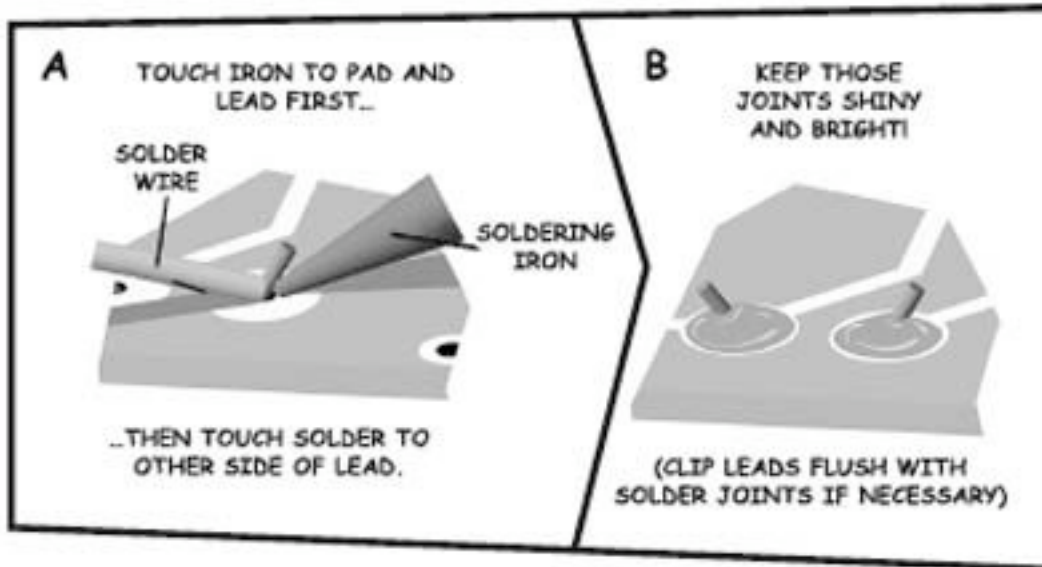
Image A above shows a good angle for iron-to-pad/lead contact and where the solder makes contact with your solder point. Image B shows what you should end up with: plump, shiny mounds of solder that fully surround the component and make complete contact with the PCB pad. Solder welds that are dull-looking, have dark spots in them (impurities), pits, depressions, or do not make complete contact with the PCB surface and the component lead are called cold solder joints. You need to desolder and resolder these as they can lead to component failure.
